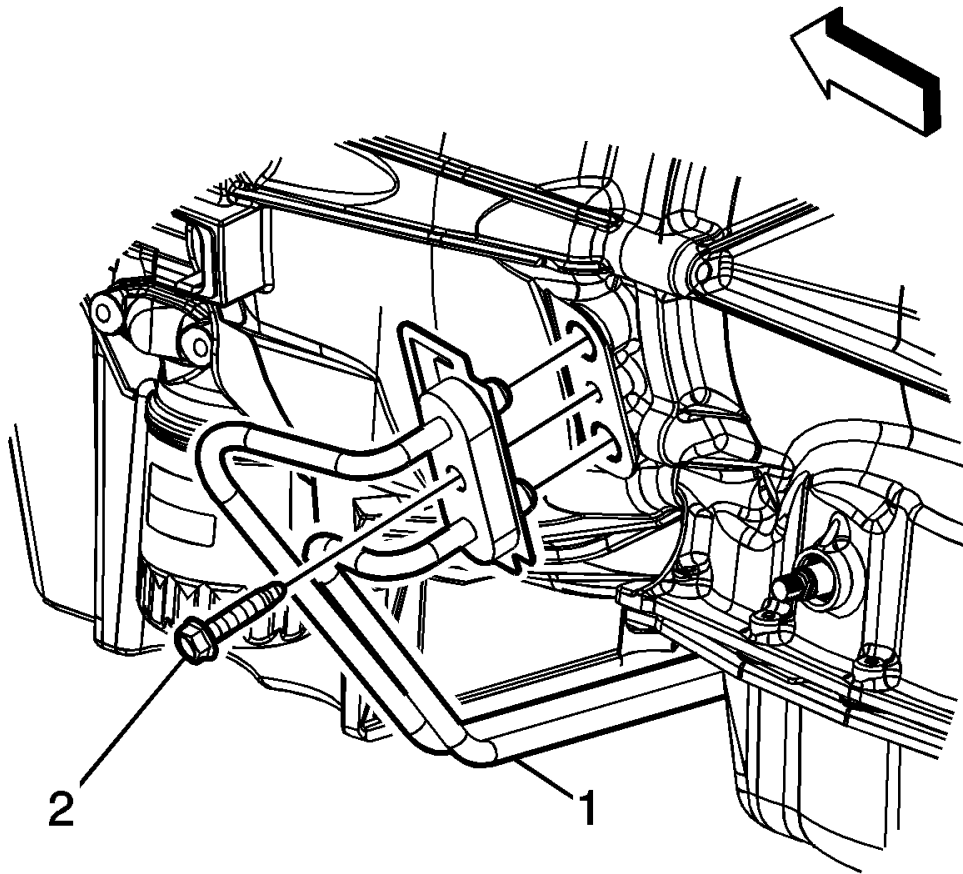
Locating Transmission Cooler Tube Bracket Nut
